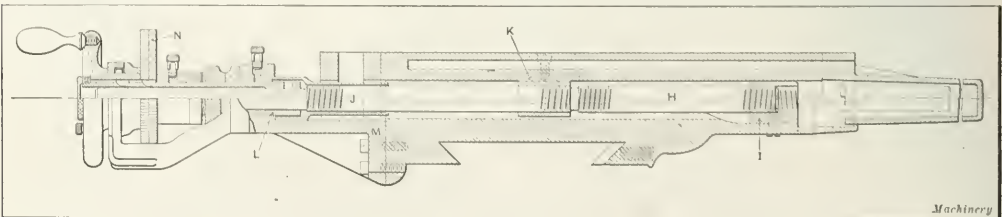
Cross-sectional View through Wheel-spindle Slide
